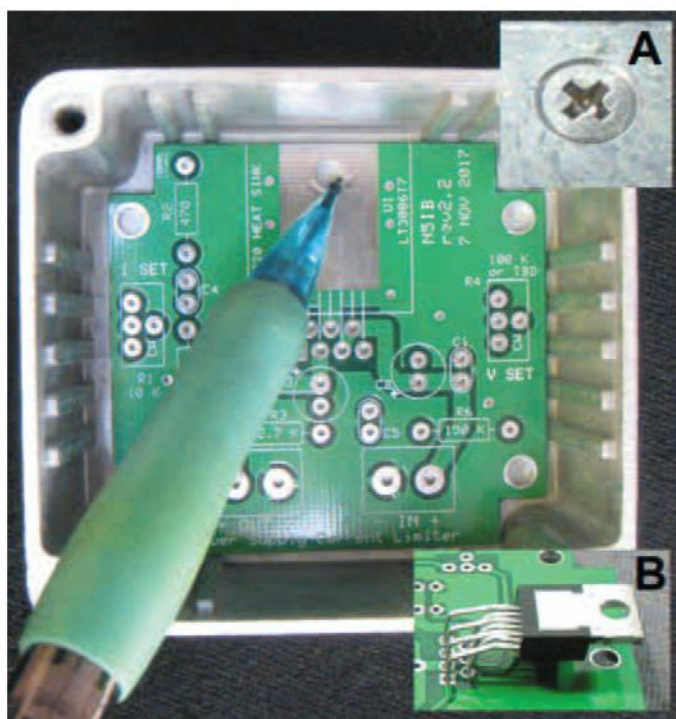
Photo D. Marking for the mounting holes. Inset A: counter-sunk screw; Inset B: regulator leads re-formed to insert from bottom of circuit board.
